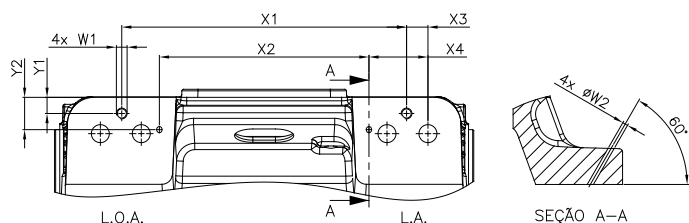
Dimensions for motors with jacking screws and dowel pins
